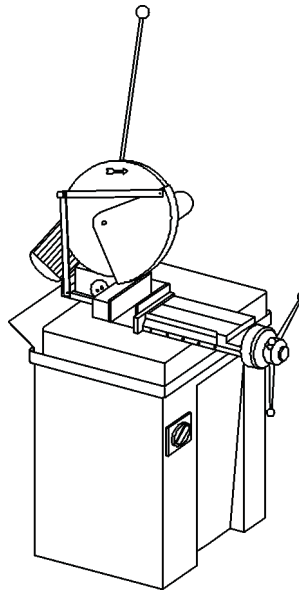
Circular sawing machine with manual feed — Pivoting head type
